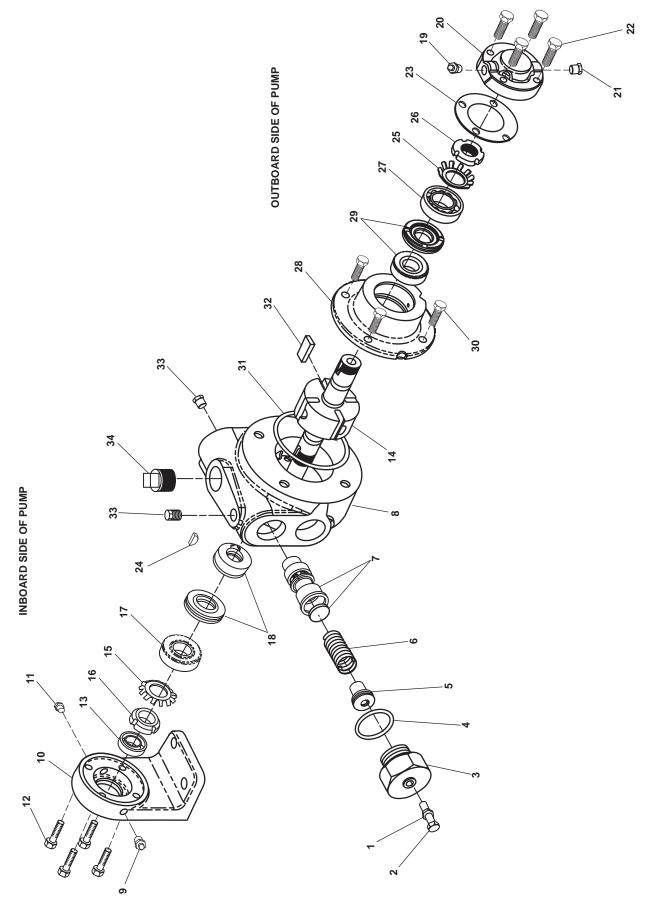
Main Engine Prelubrication Pump (Exploded View)
